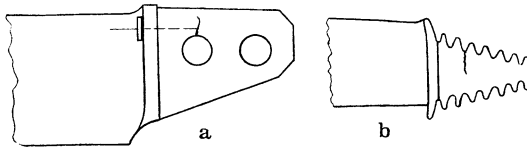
Cracks in base of blades of different shapes. a Possibly detectable while assembled; b in fir-tree root, detection very difficult
